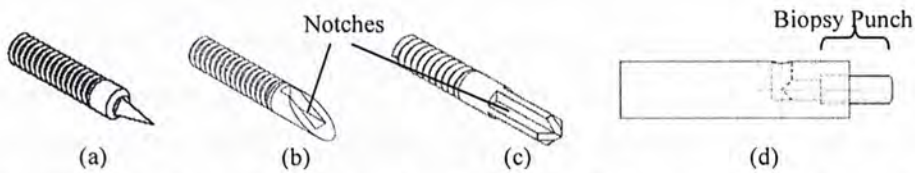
Punch head of: (a) pyramidal shape; (b) U-shape; (c) star-shape; and (d) hollow shape
